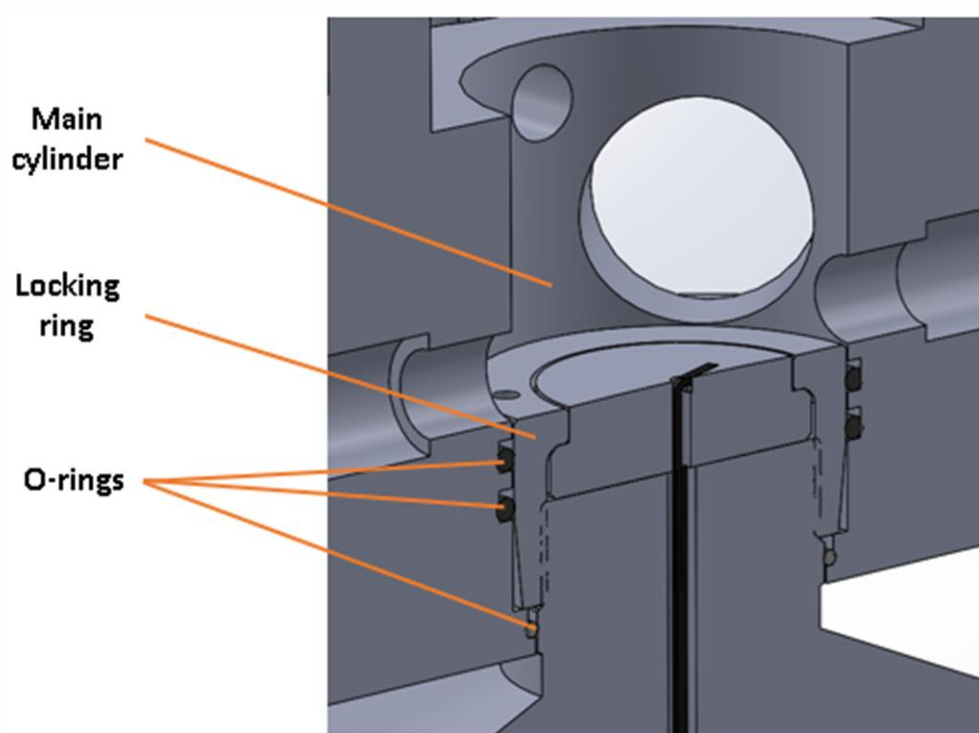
Heater block, locking ring, and main cylinder sealing arrangement.
